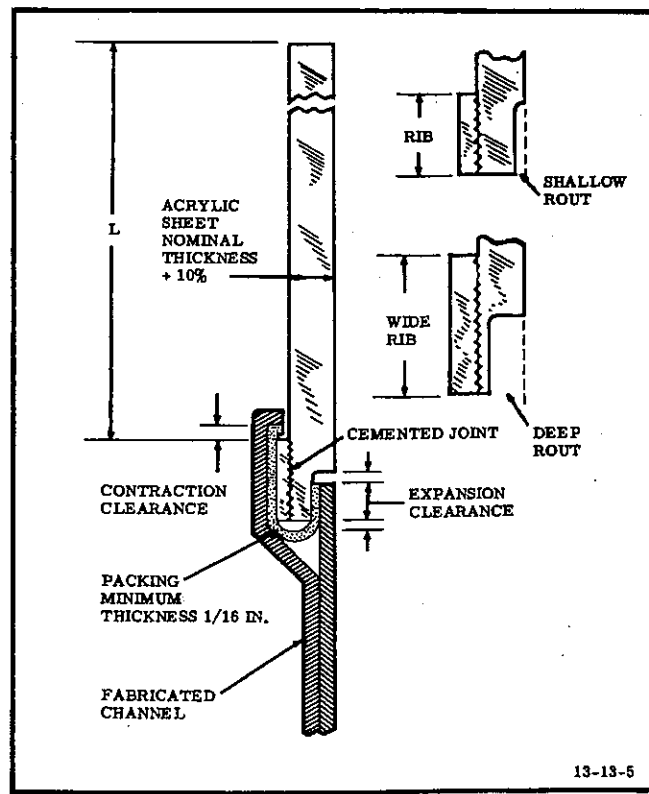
Flush Mounted Clamp Installation with Reinforcing Rib
